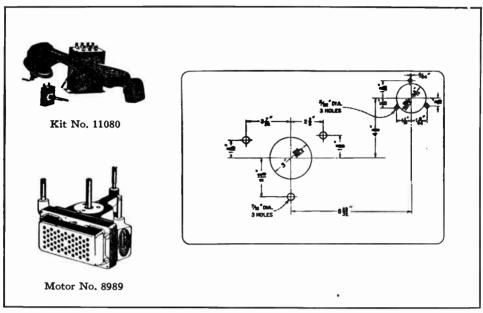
Motor Board Layout showing dimensions and location of all holes required for mounting Stock No. 11080 Kit and Stock No. 8989 Motor.
